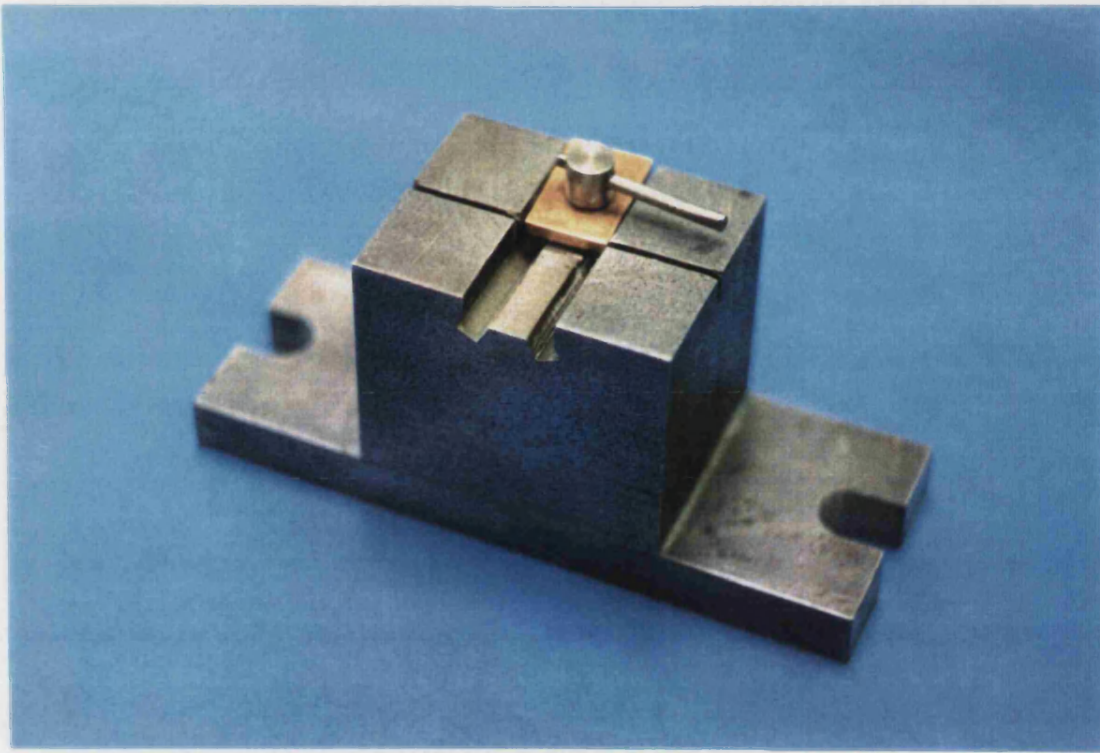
Purpose Made Jig for Notching Work of Fracture Specimens - Top View.
